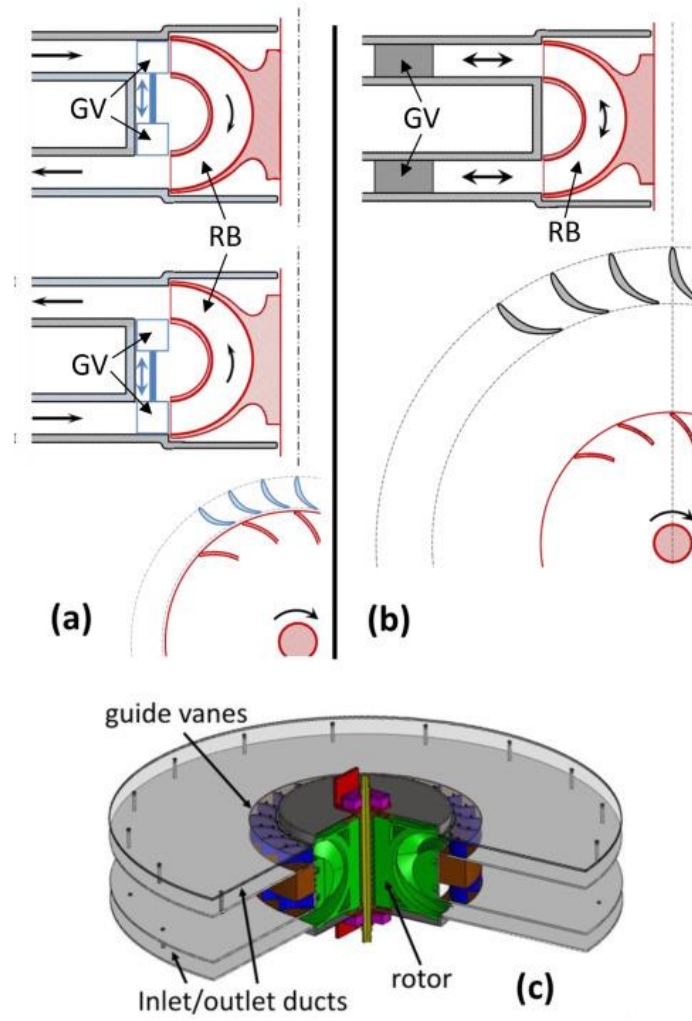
Biradial turbine: version 1 (a); version 2 (b); perspective view version 2 (c). GV = Guide Vanes, RB = Rotor Blades [33]
